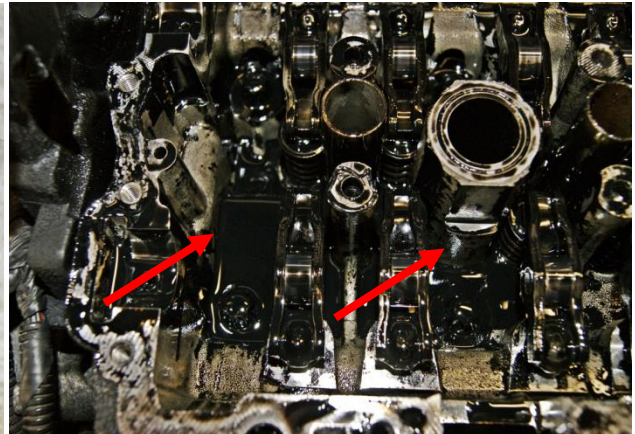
The oil remains in the cylinder head and develops into gel – suck it out! Remove all residue from the suction channels
